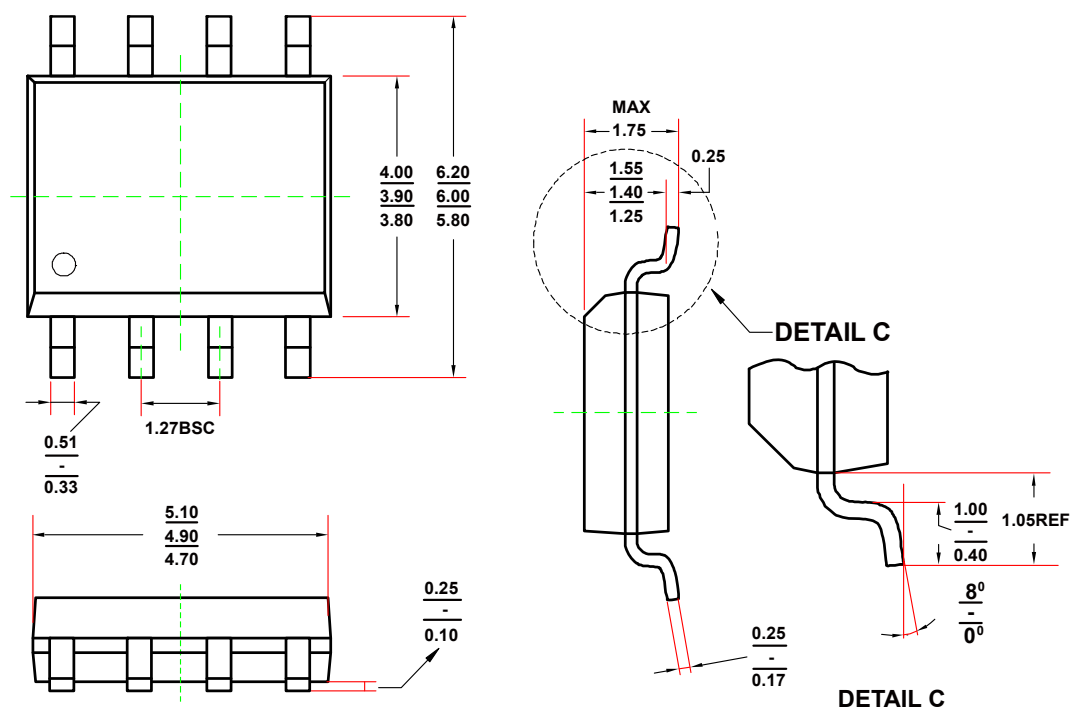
8-Lead SOIC Package Dimensions shown in millimeters
